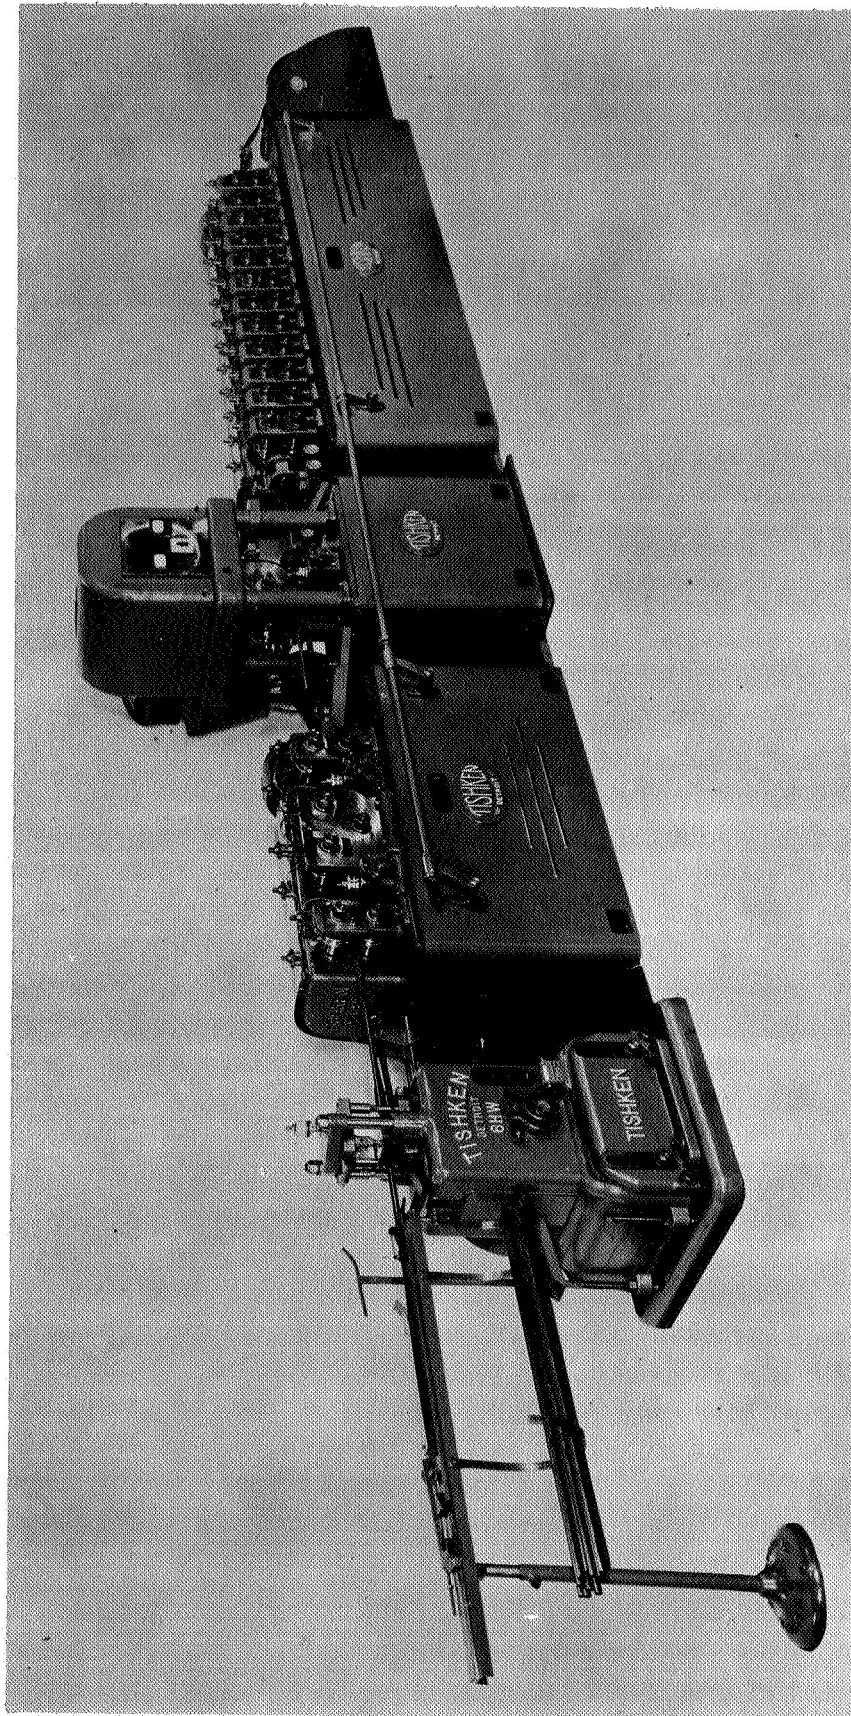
PRODUCTION LINE FOR PRODUCING WELDED TUBING
